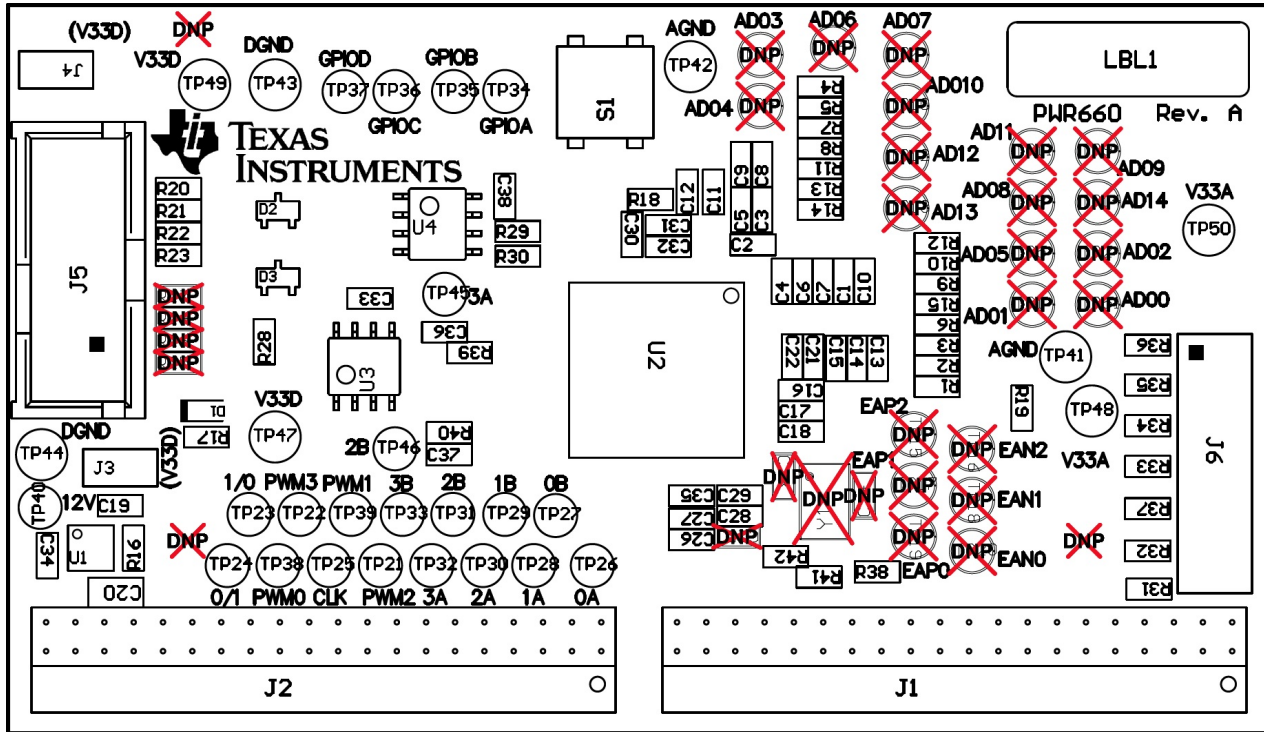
UCD3138A64EVM-660 Top Layer Assembly Drawing (Top View)
